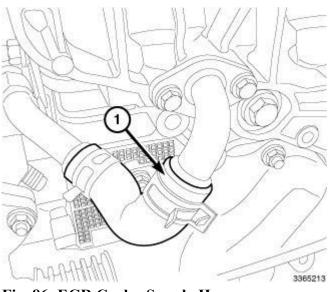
EGR Cooler Supply Hose Courtesy of CHRYSLER GROUP, LLC
